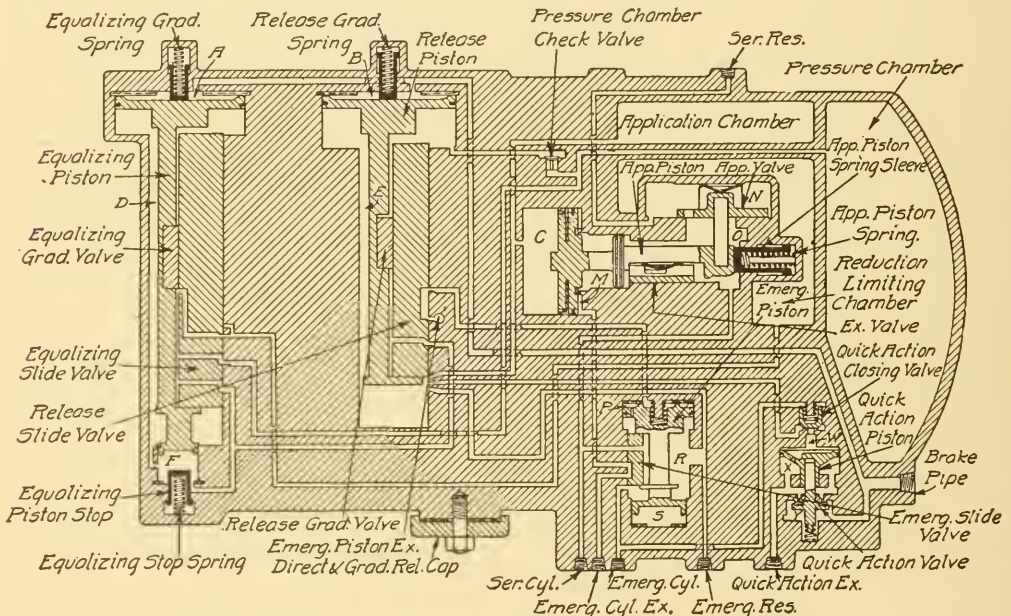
Emergency Position, Quick-Action Valve Venting, for Westinghouse "3-E Control Valve
